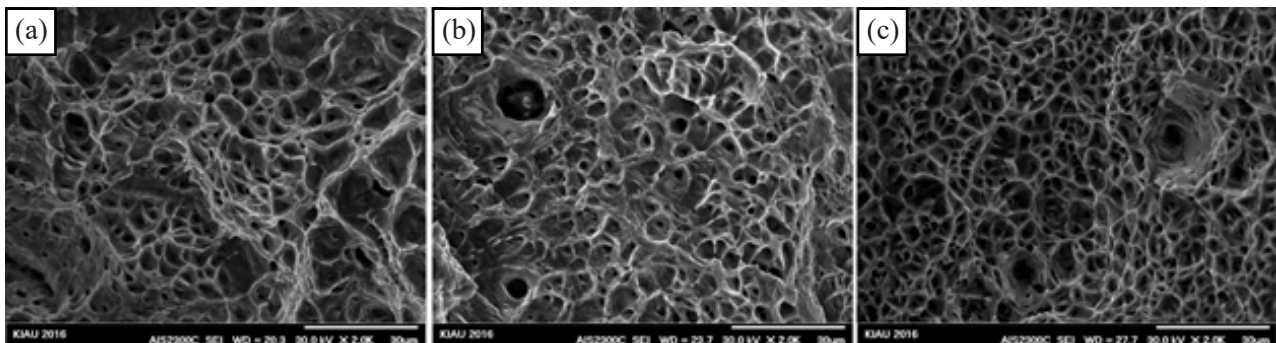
SEM micrographs from fracture surfaces of different welds: (a) 90A, (b) 100A, and (c) 115A.
